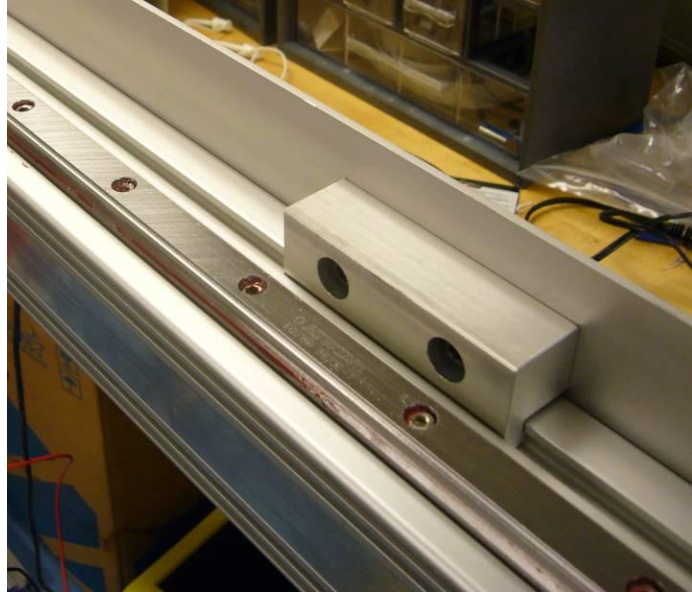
Toe clamps attach the x-axis to the system frame via two aluminum angle brackets
